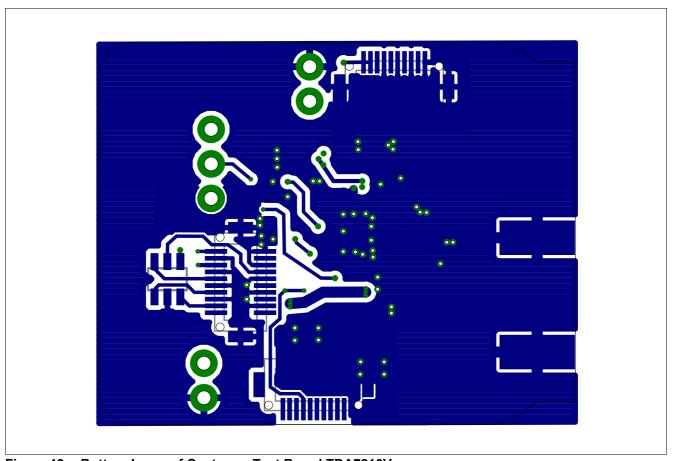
Bottom Layer of Customer Test Board TDA7210V
